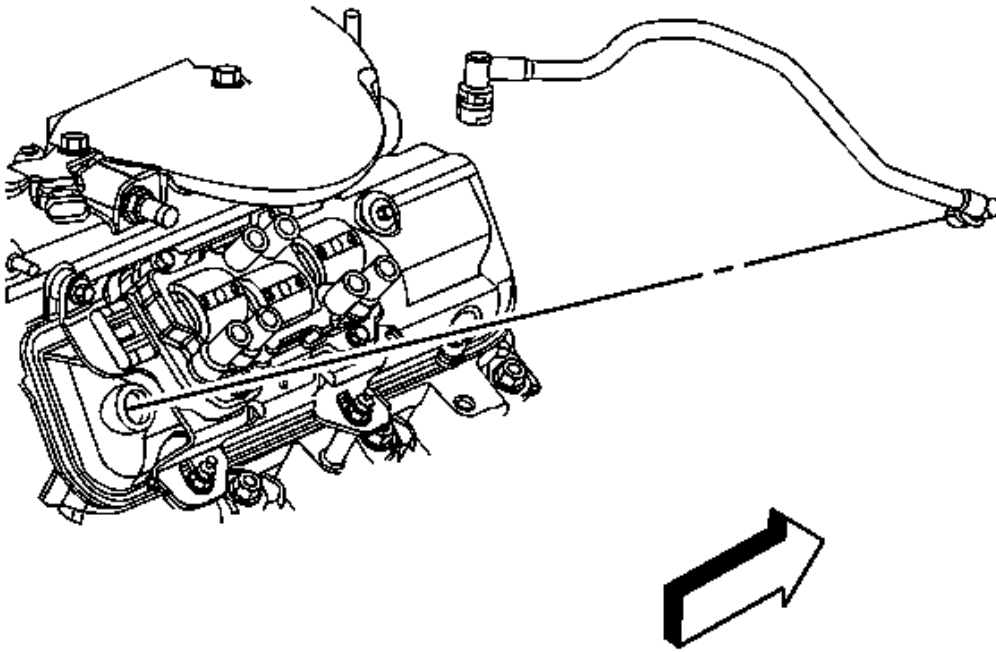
Identifying Positive Crankcase Ventilation (PCV) Fresh Air Tube
